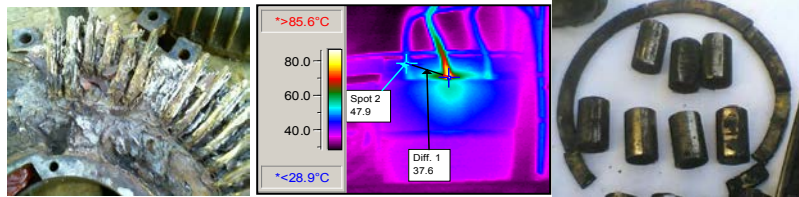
Samples of damaged components (rotor, connection boxes, bearings), (Pitis, 2007)
